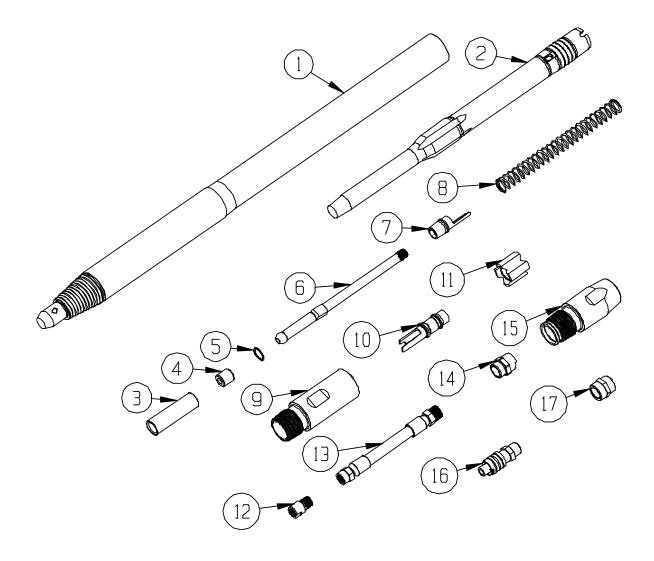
Typical Hole-Hog Assembly (Non-Threaded Body/Anvil)
